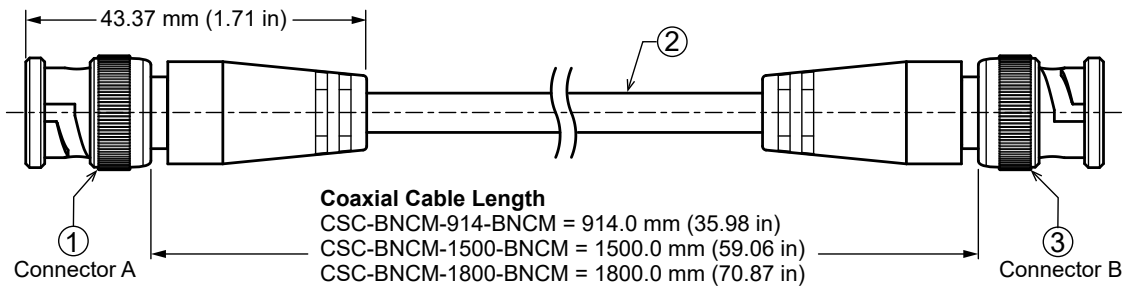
Product Dimensions for the CSC-BNCM-ccc-BNCM Cable Assembly
